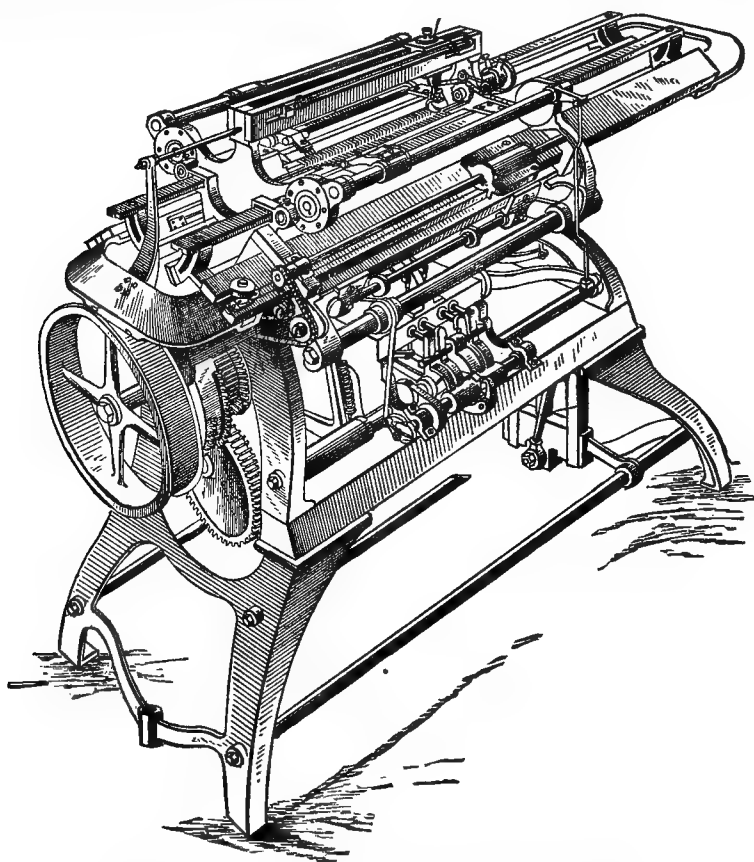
Straight rib-knitting machine with fashioning mechanism.
